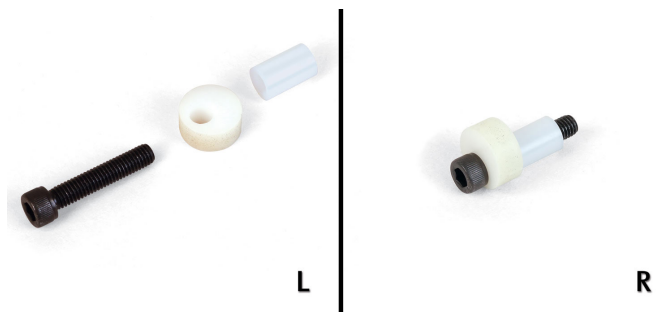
Left: 10-32 x 1" SHCS P/N 40340, eccentric trigger P/N 68039, and nylon spacer P/N 68044; Right: Assembly
